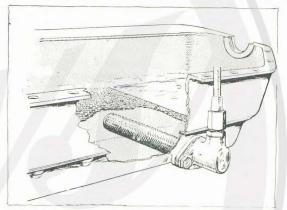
CUT-AWAY VIEW OF THE 14 H.P. "STANDARD" CRANKCASE.
